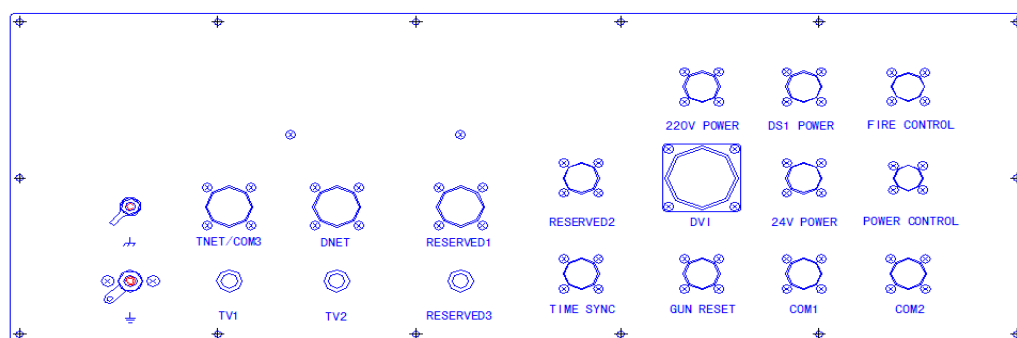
Arrangement diagram for socket board of display back (ZB1)
